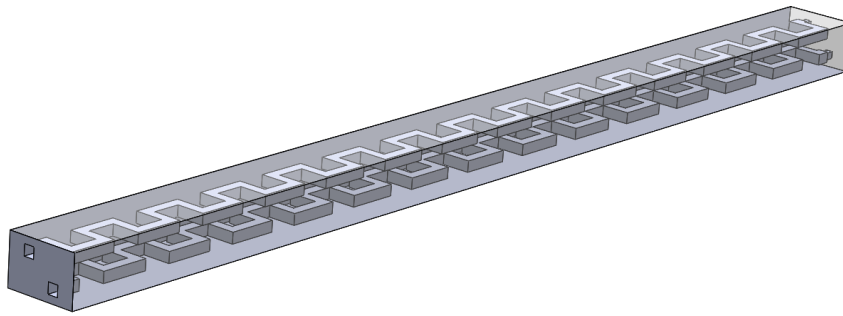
A single ES-SRR, designed in Solidworks. Longest dimension is 154 mm
